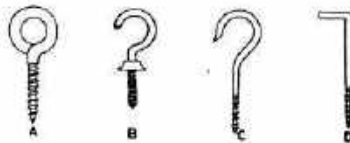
(A) EYE SCREW (B) CUP HOOK (C) SCREW HOOK
